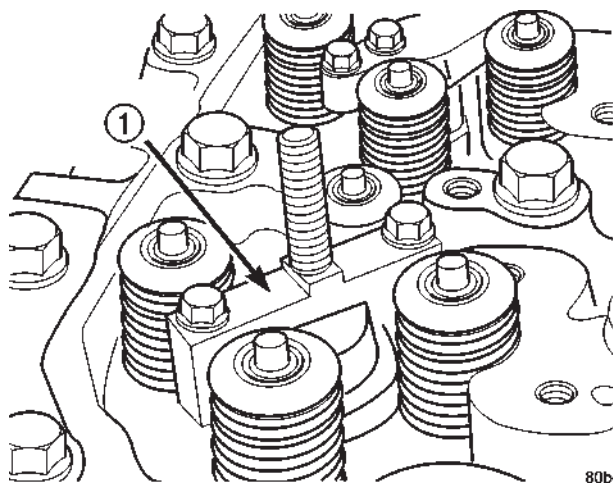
Spring Compressor Mounting Base—Part of Tool 8319-A
